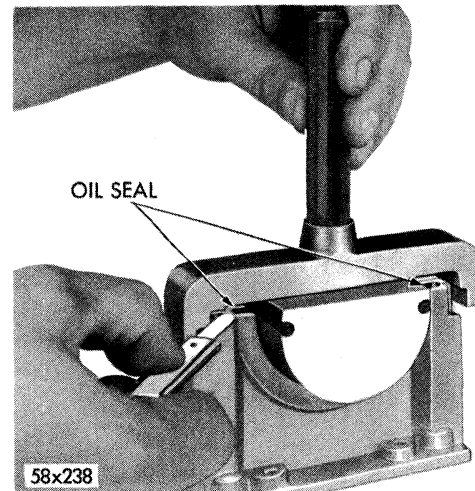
Trimming Rear Main Bearing Lower Oil Seal
